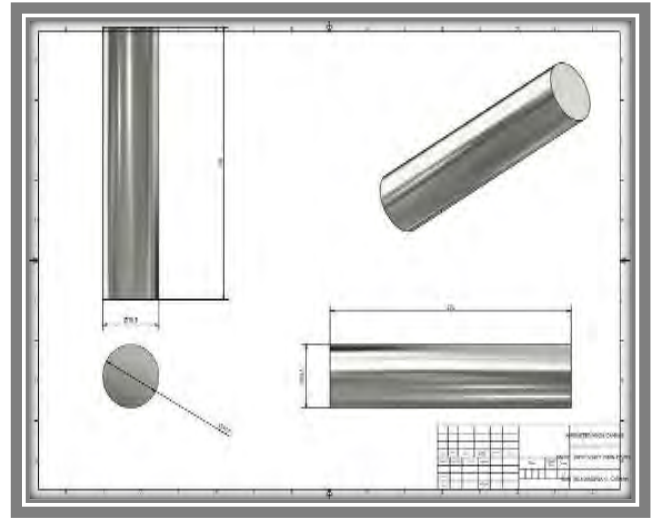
, SN 26: Main Hydraulic Piston Base Mount Shaft
